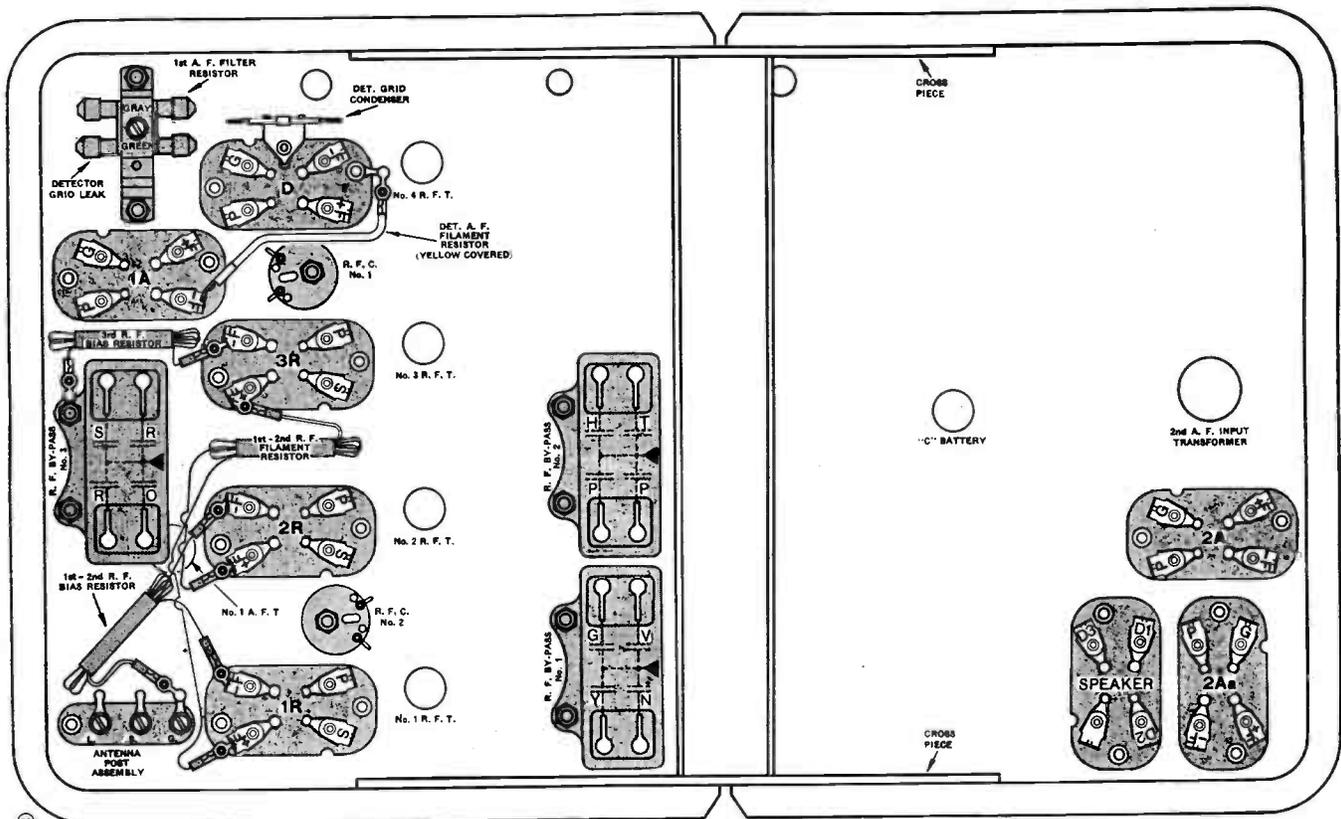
BOTTOM VIEW OF TYPE Q CHASSIS.
